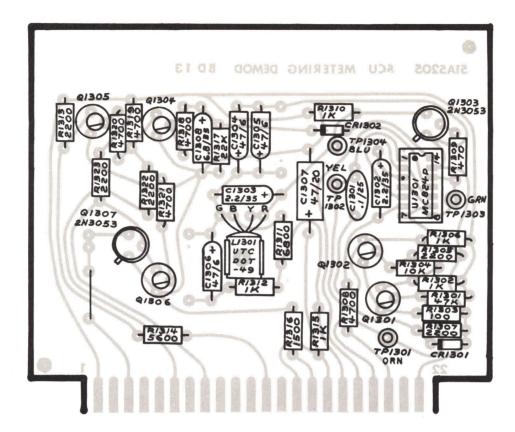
SCU Metering Demodulator (Board 13), Parts Location
